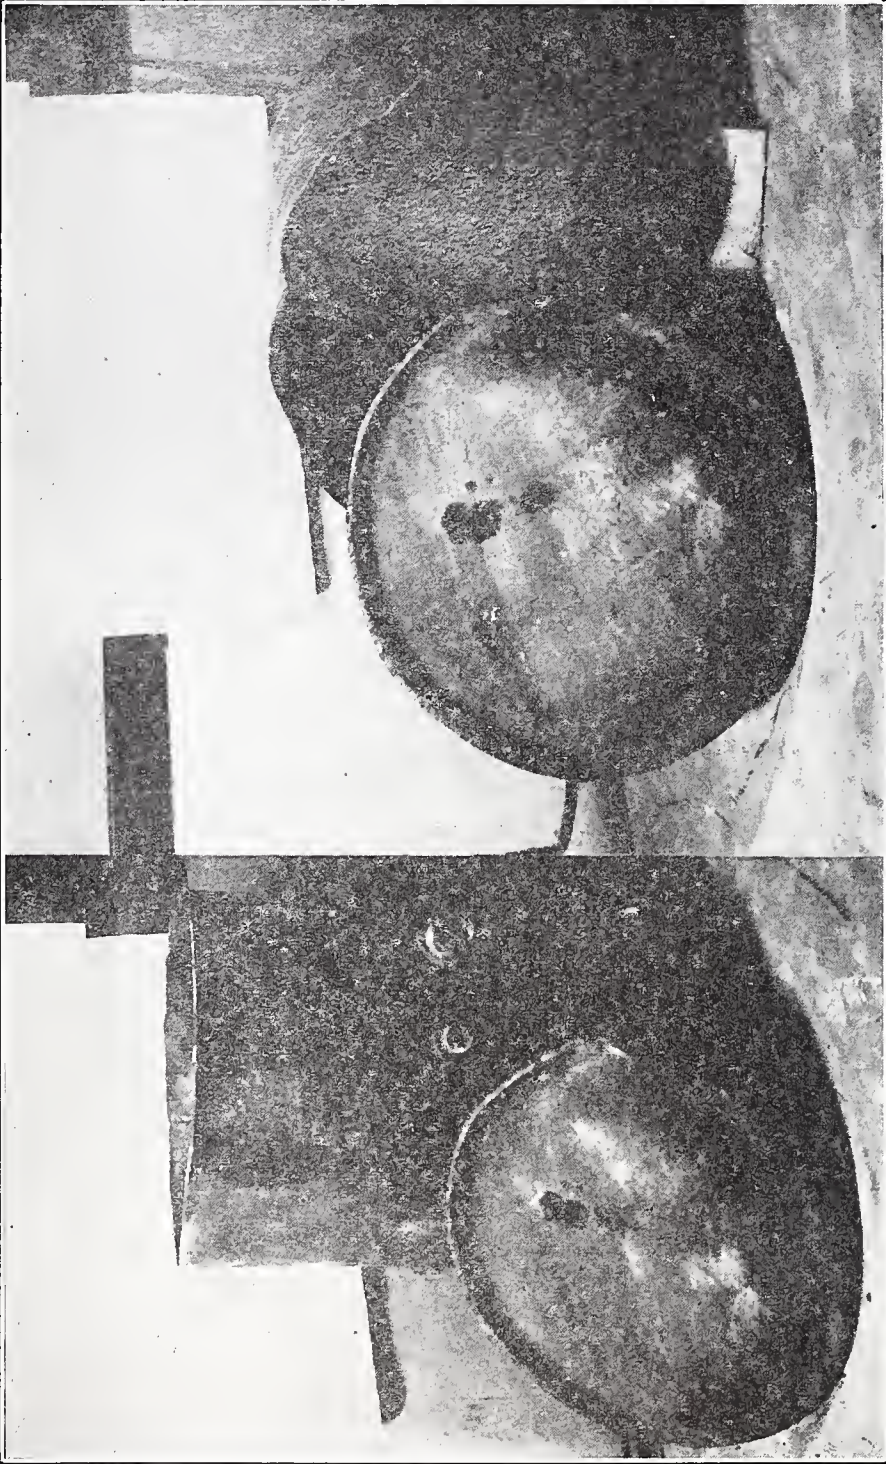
AIR RECEIVER RUPTURED AFTER EXPLOSION
